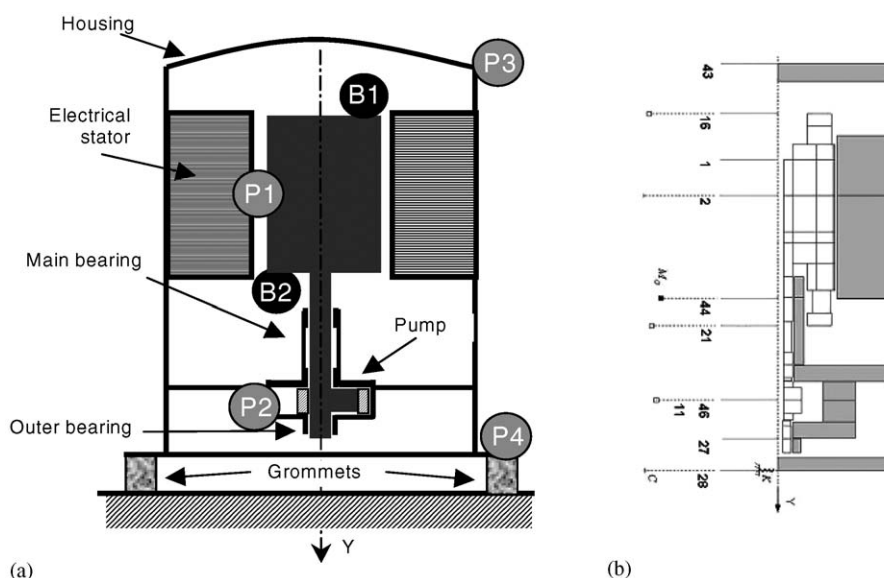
Sketch (a) and FE model (b) of the rotary compressor.
